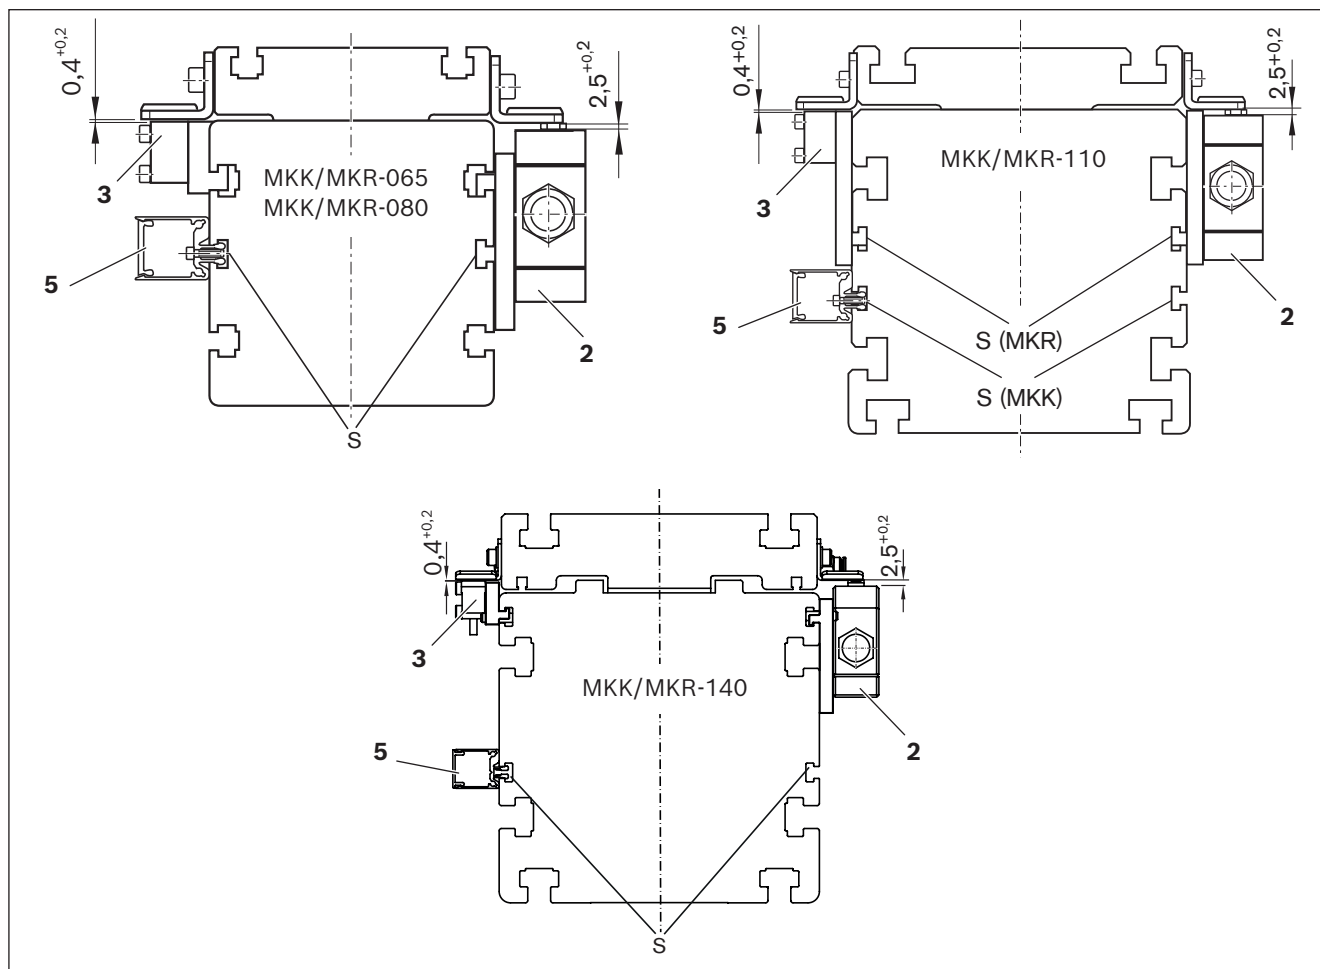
Proximity sensors and mechanical switches MKK/MKR -065/-080/-110/-140-NN-3
